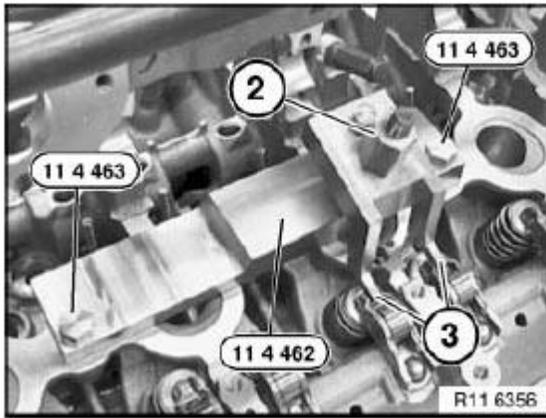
Identifying Rocker Arms And Spindle Nut With Special Tools (11 4 463 And 11 4 462)
